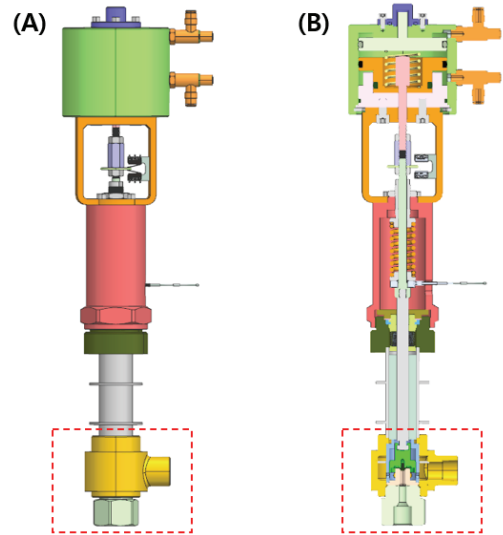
3D geometry of the PSV system: (A) external view, (B) cross-sectional view
